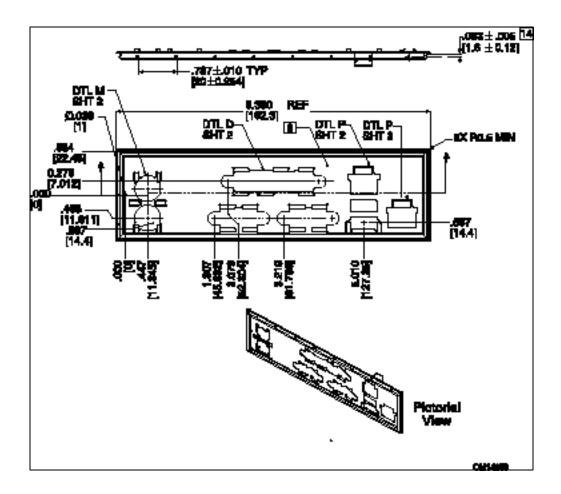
S845WD1-E Server Board I/O Shield Drawing
